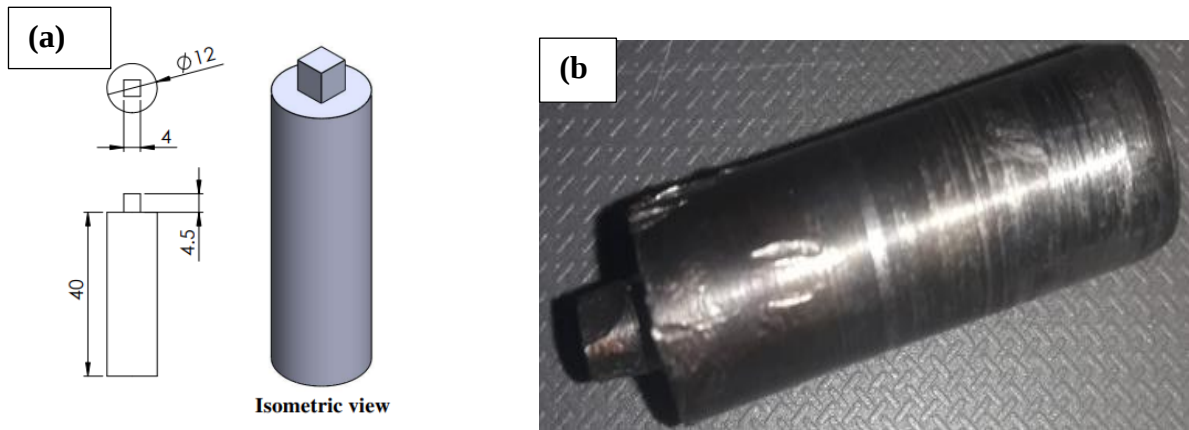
Tool specifications (a) Design of welding tool, (b) Fabricated square pin tool
